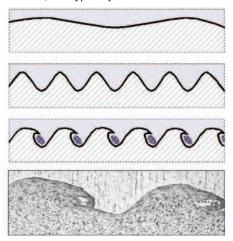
Three types of transitions resulting from explosion welding - laminar, wavy and turbulent. Sometimes the waves can even tip over as shown in the photo.
